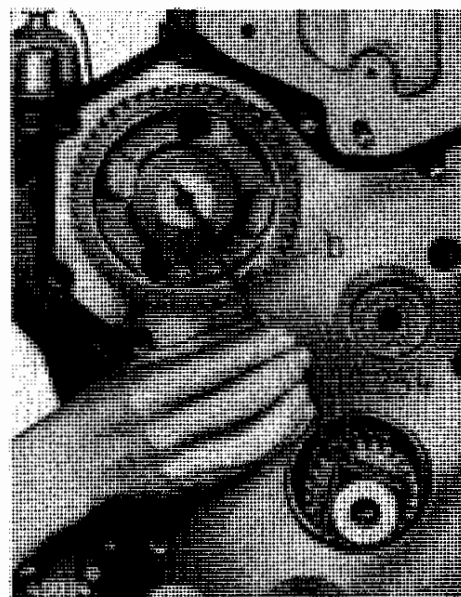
Timing Camshaft Gear by means of Special Tool No. JD 254
